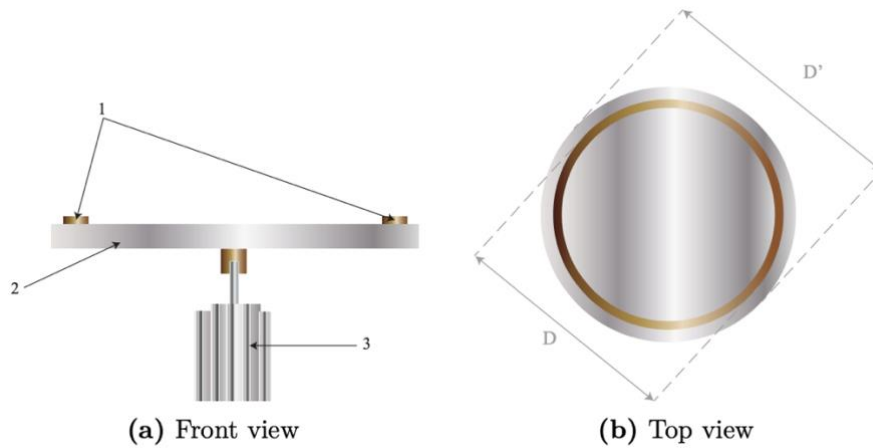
Axial symmetry layout. 1) Track; 2) Rotating disk; 3) Motor.
